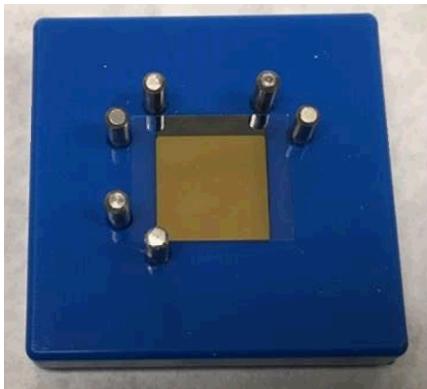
Glass sheets within the custom build alignment fixture. A complimentary cap fits over the pegs to allow for the application of uniaxial pressure.
